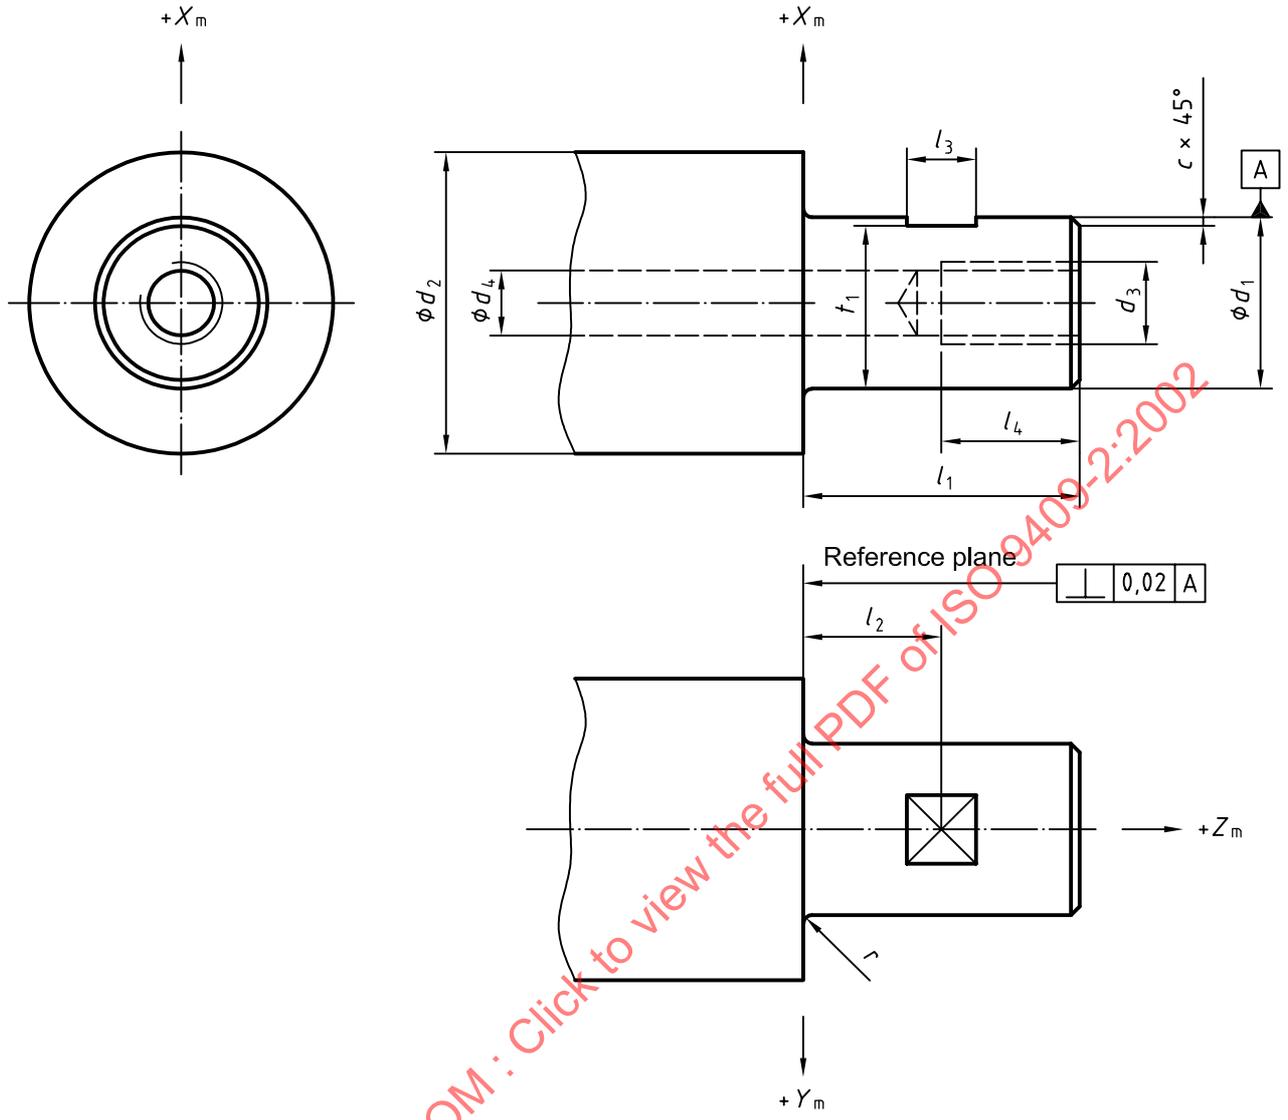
Basic layout of the shaft mechanical interface Type 1
